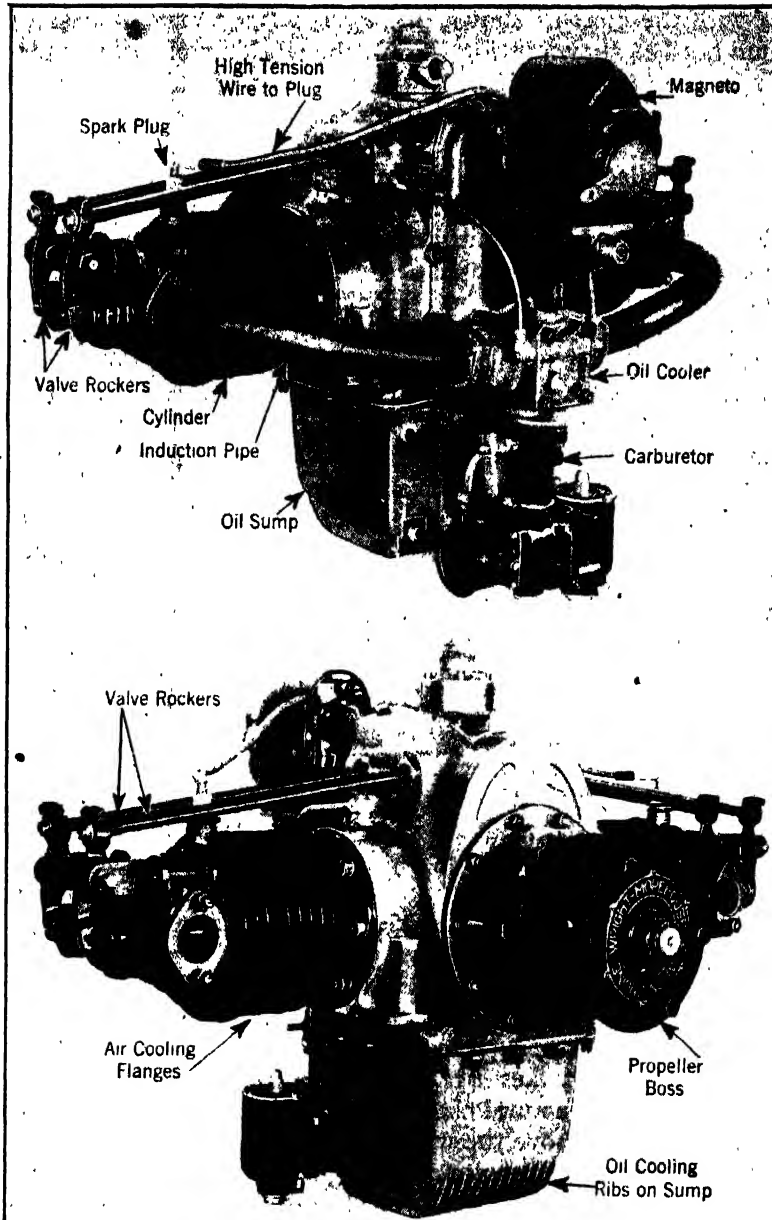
The Wright-Morehouse Two Cylinder Aviation Engine. At Top—Rear View Showing Ignition Magneto and Carburetor. At Bottom—Engine Viewed from Propeller End.
